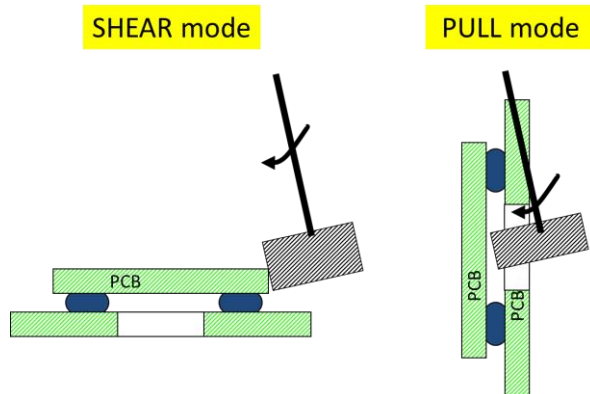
Schematic drawing how samples can be tested under both shear and axial (pull) shock mode.
